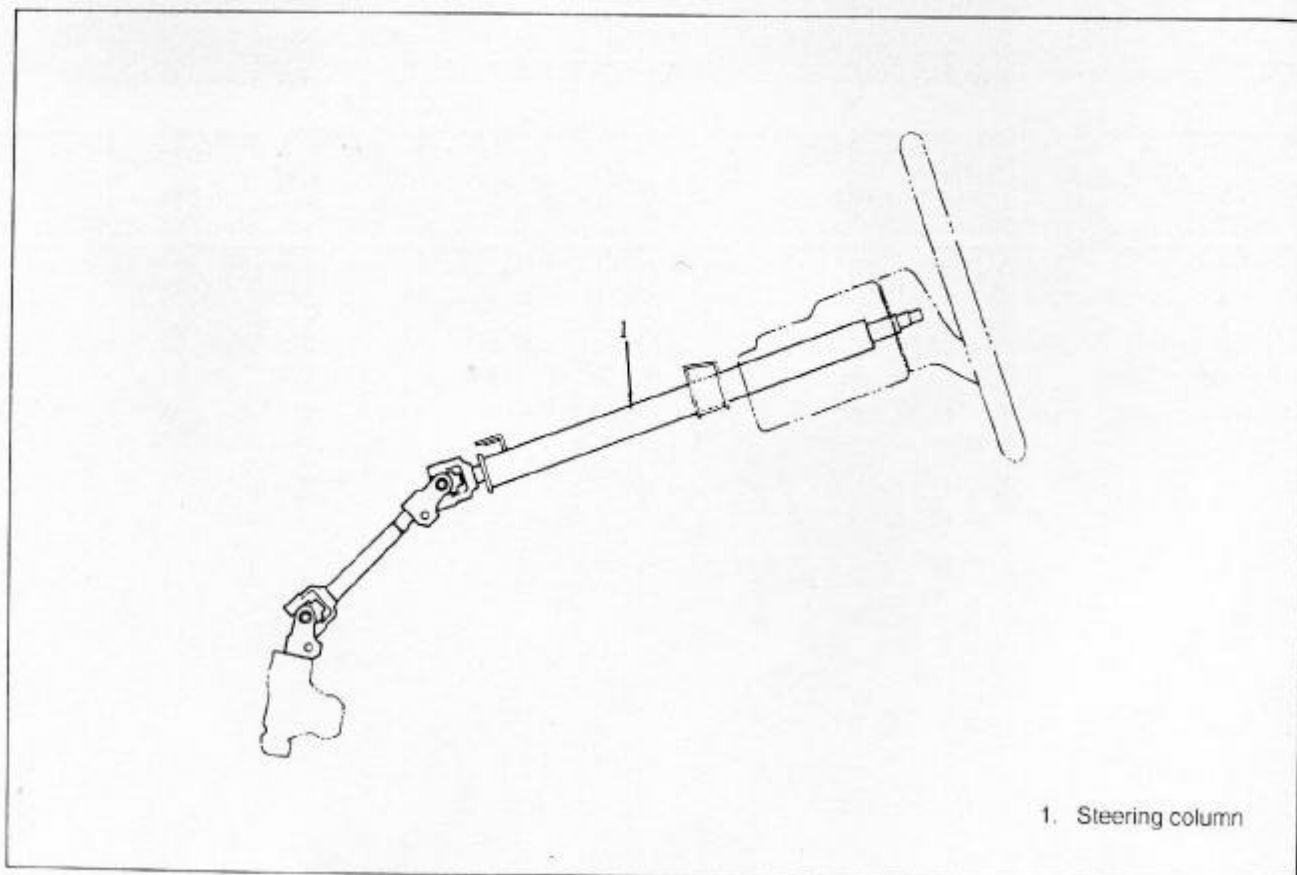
C — 2 STEERING COLUMN SHAFT ASSEMBLY
